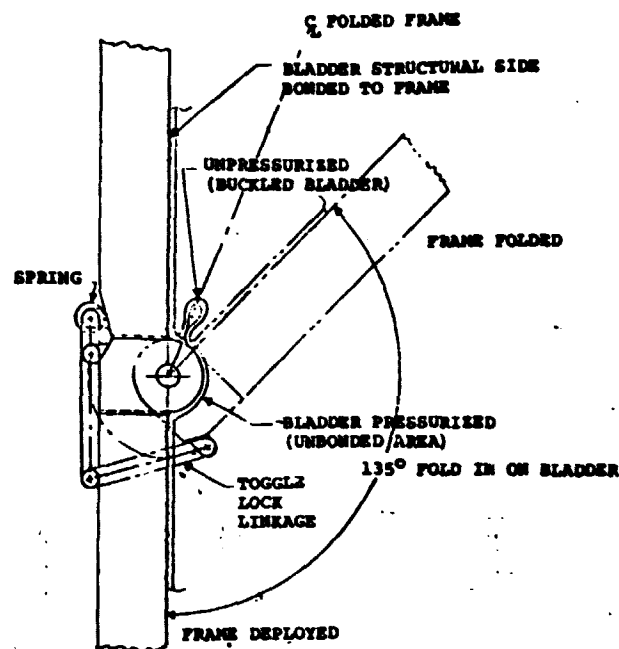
135° INSIDE BLADDER FRAME BEND
